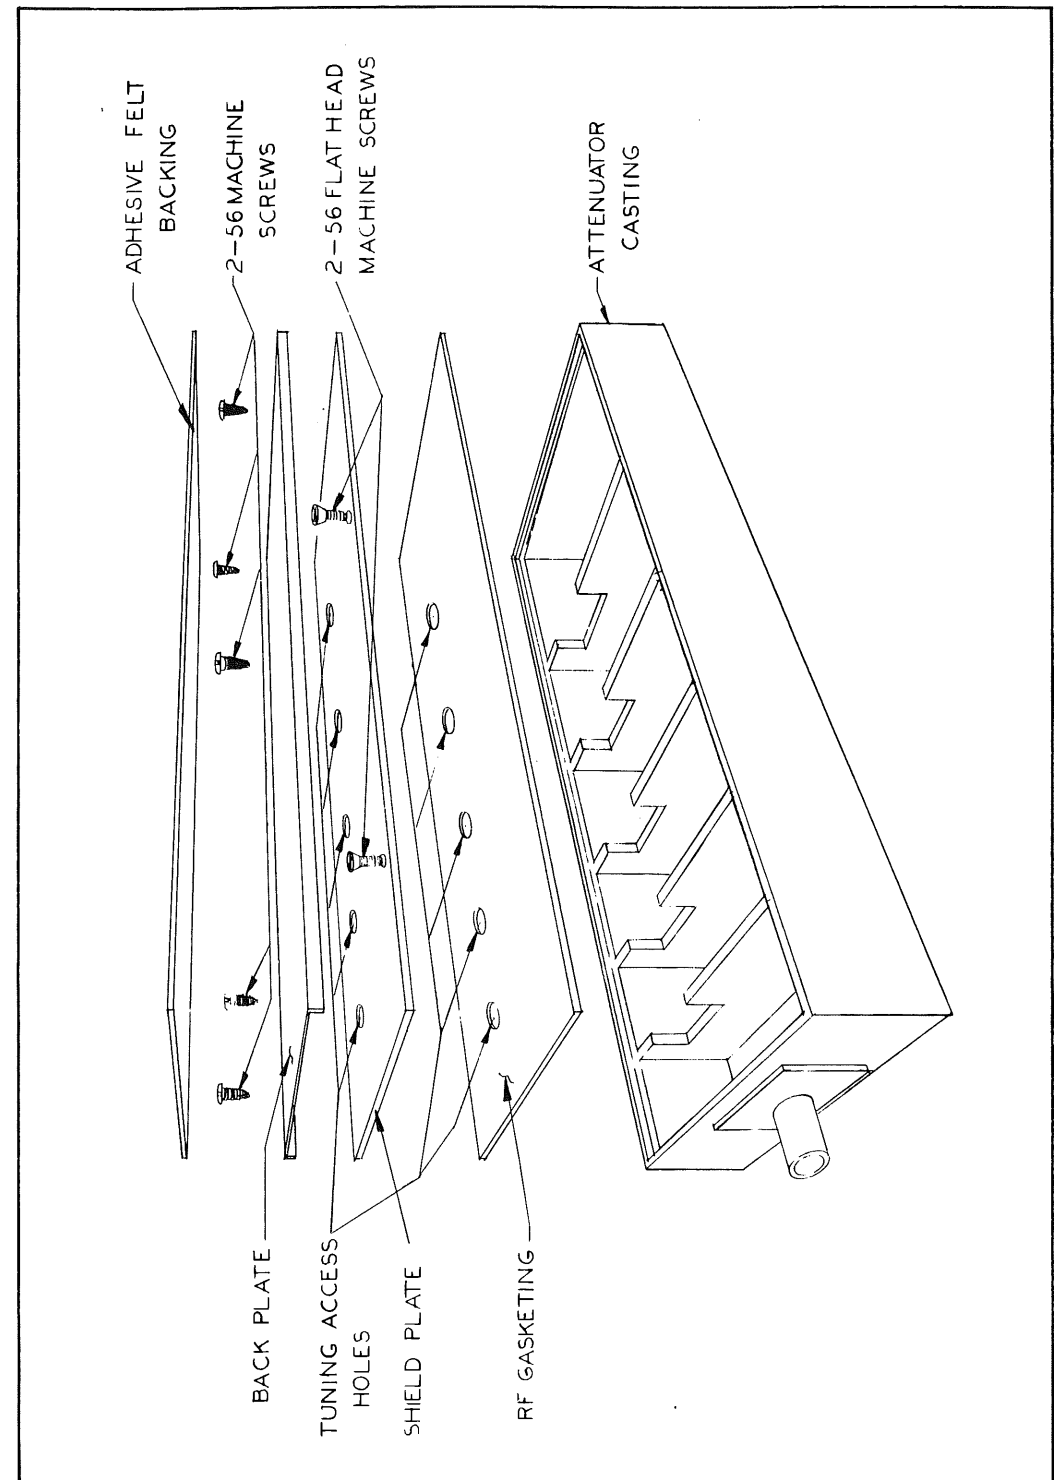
BACK PLATE ARRANGEMENT 3, EXPLODED VIEW
